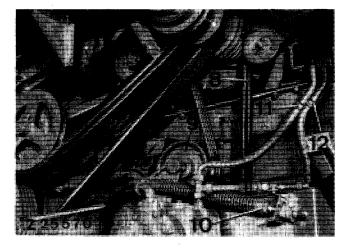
Preparing to Remove Engine (Combines with Posi-Torq Drive)
